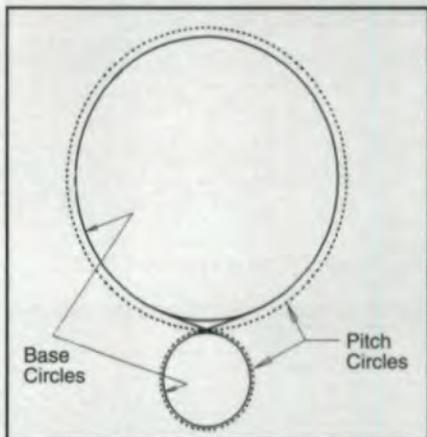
Involute geared transmissions are ideally equivalent to crossed-axis belt drives.
